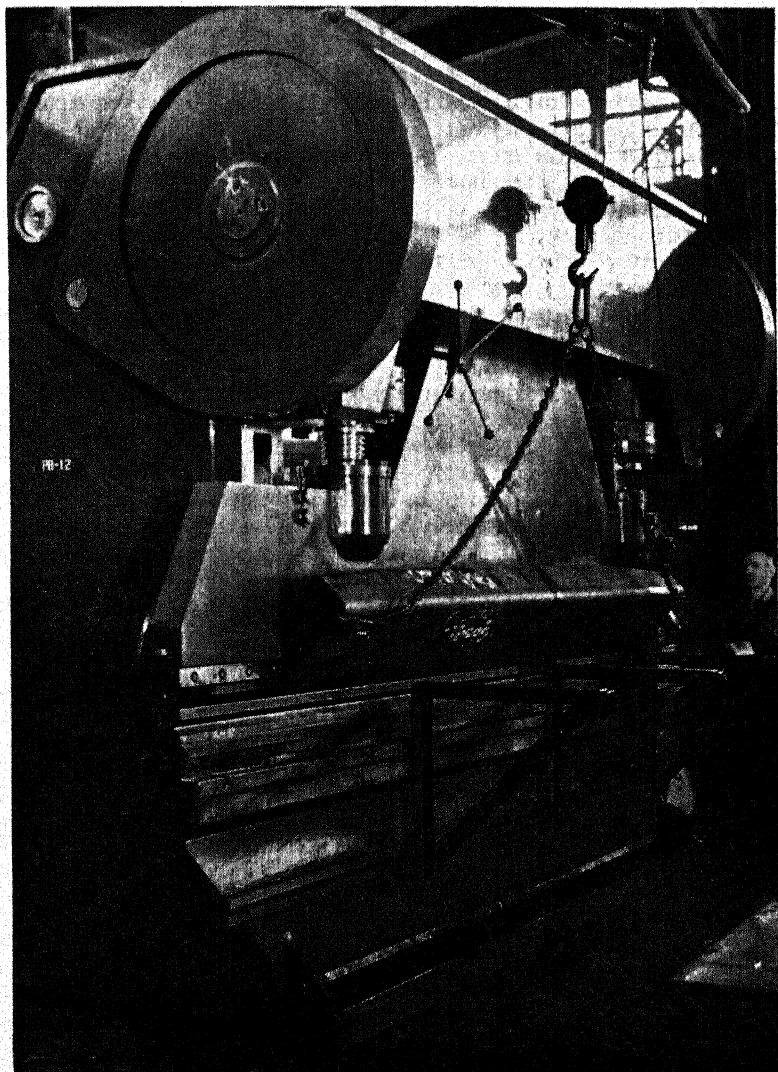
There is no more profit producing tool in a weldery than a plate brake. Note that brake is all-welded.
